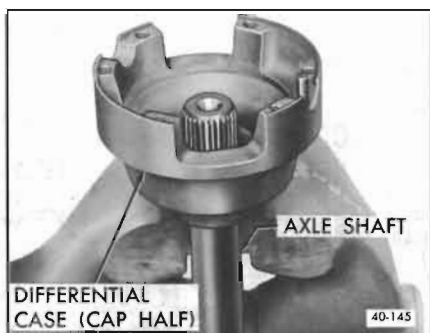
Axle Shaft &amp; Cap Half of Differential Positioned in a Vise
